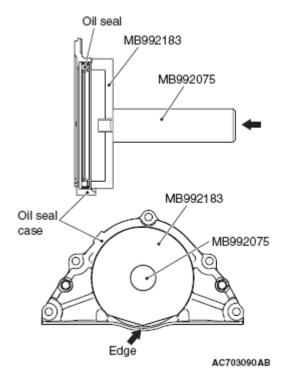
Fitting Crankshaft Rear Oil Seal Into Oil Seal Case Using Special Tool MB992075 And MB992183
